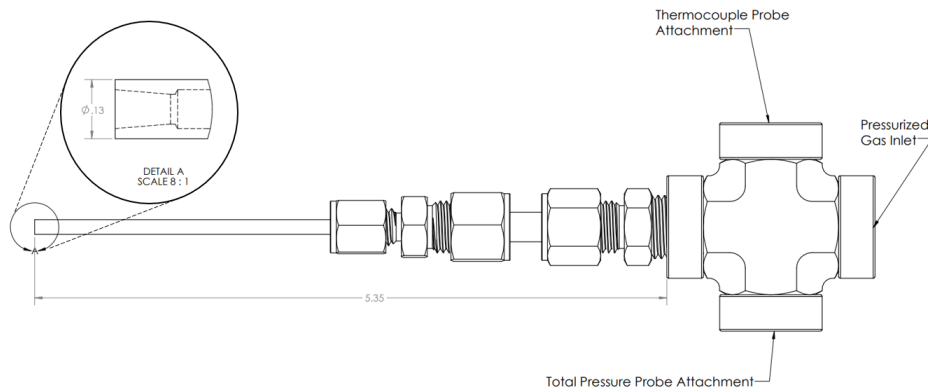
Sting assembly for retronozzle with ports for measurement probes identified.
